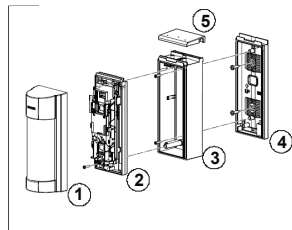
1 – front cover, 2 – detector main board, 3 – rear cover, 4 – mounting plate, 5 – rear cover cap
